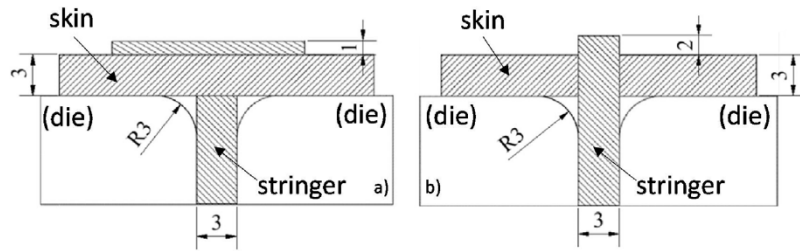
Schematic view of the joint configurations tested (dimensions in mm): a) T-lap joint, b) T-butt joint.
